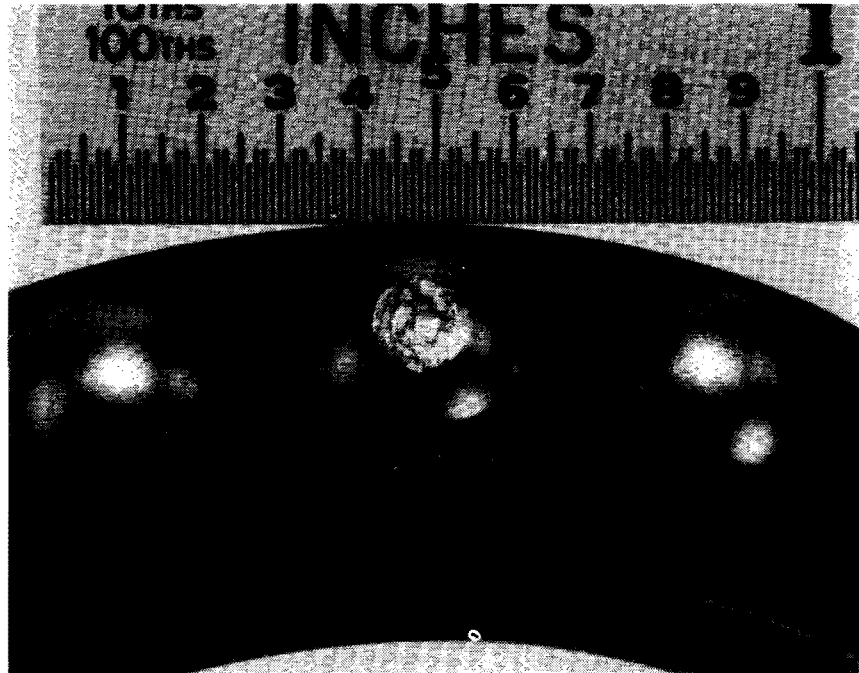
90-Degree Gearbox -424 Bearing Ball Fault C/D,
